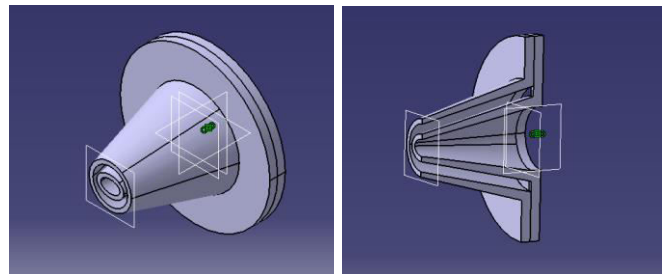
Isometric view and cut section view of circular co-axial nozzle.
